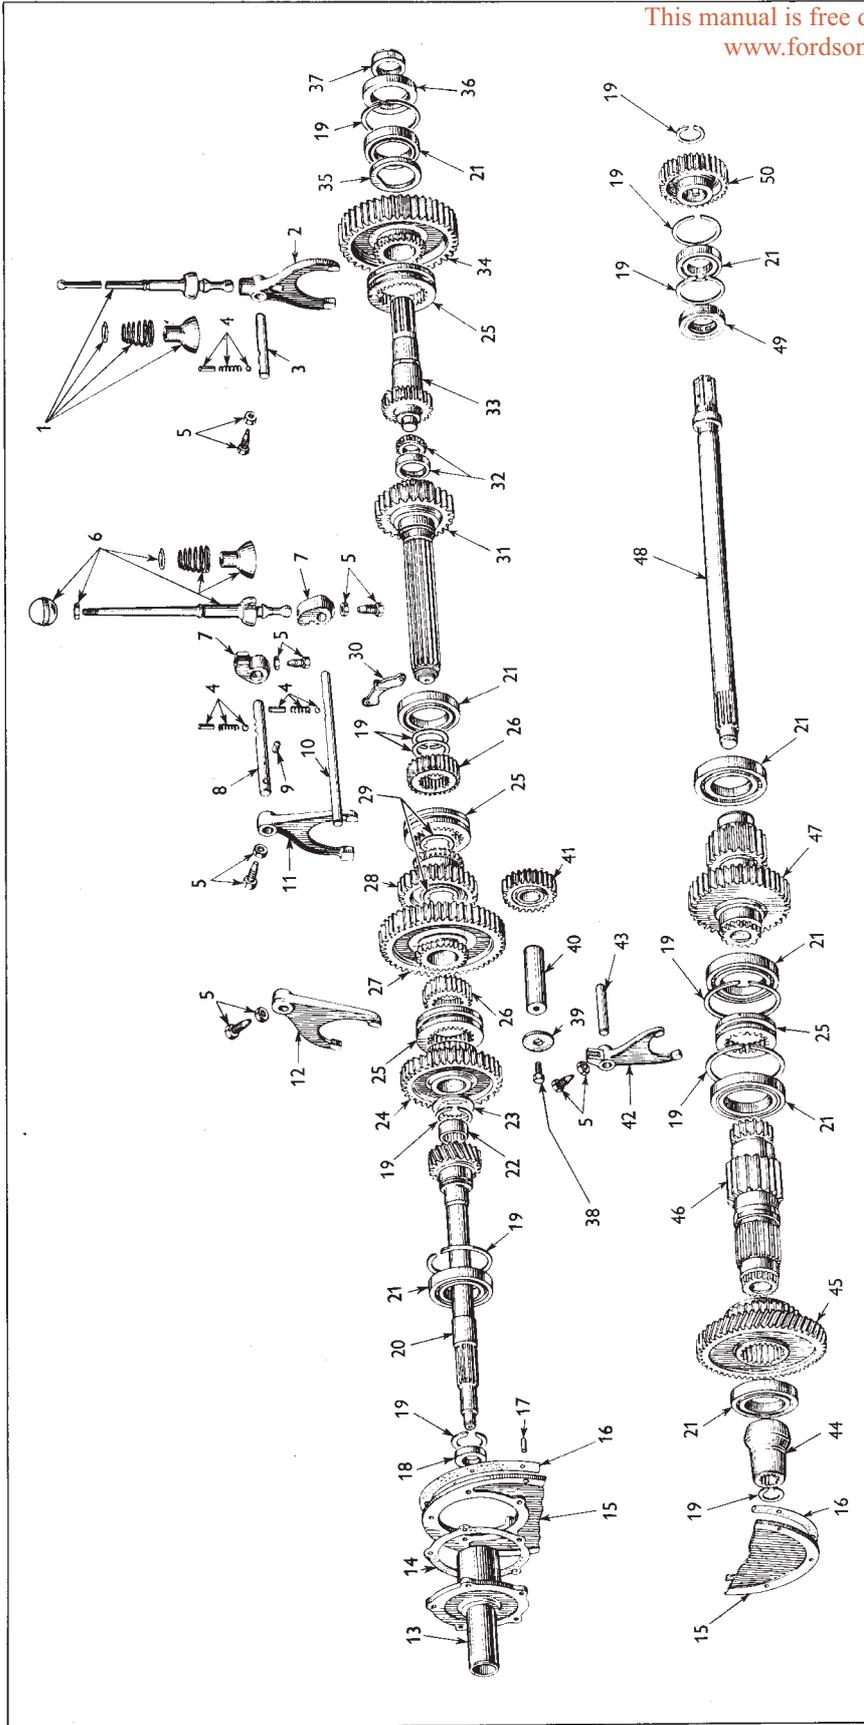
Exploded View of Gearbox (Standard Transmission)
